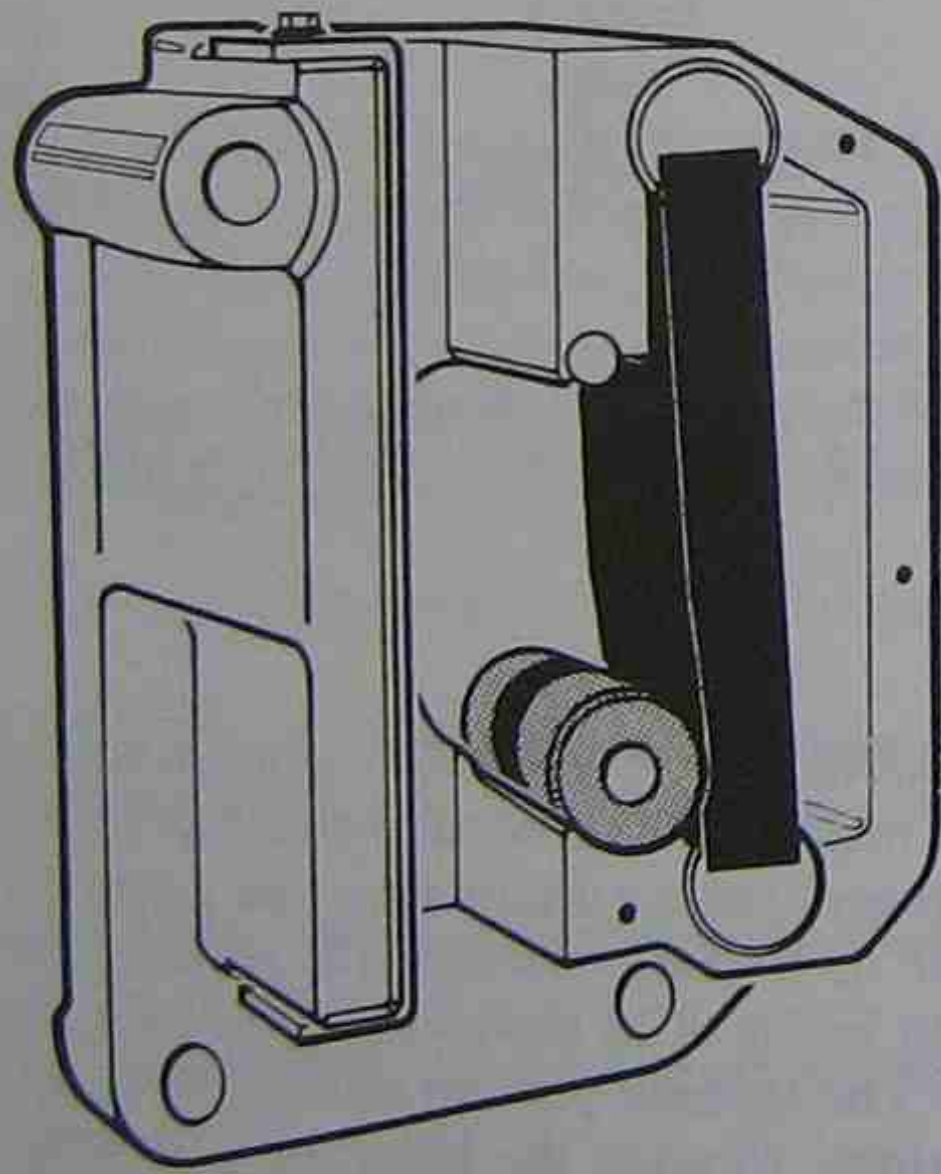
Progressive safety gear of roller type (Otis Elevator Co.).
